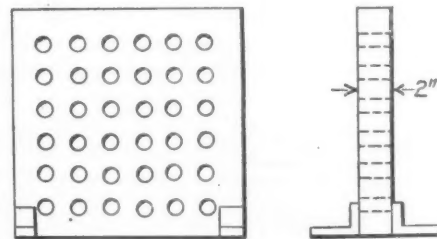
Reference Block Gage for Step Diameters of Taper Bolts
